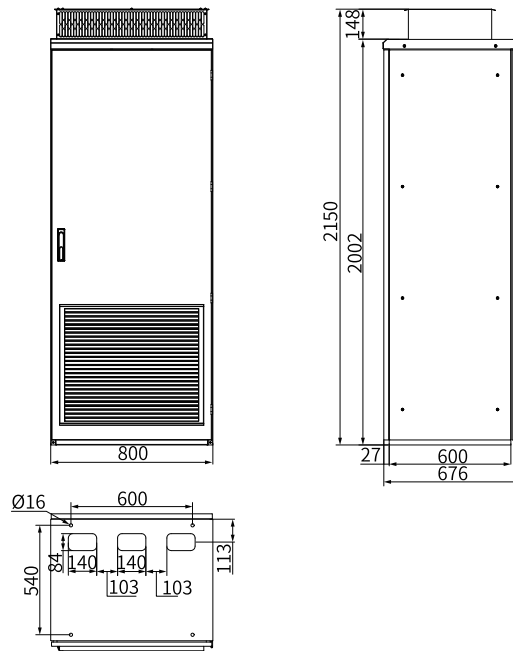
Dimensions of 3 x H8 drive cabinets (mm)
